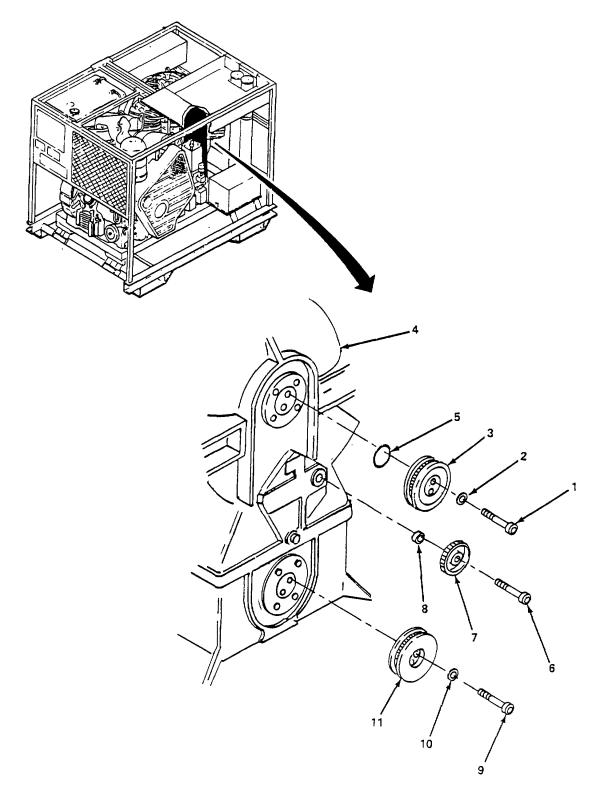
Tension Pulley Assembly, Driving Gear and Eccentric Shaft Drive Gear, Replace.
